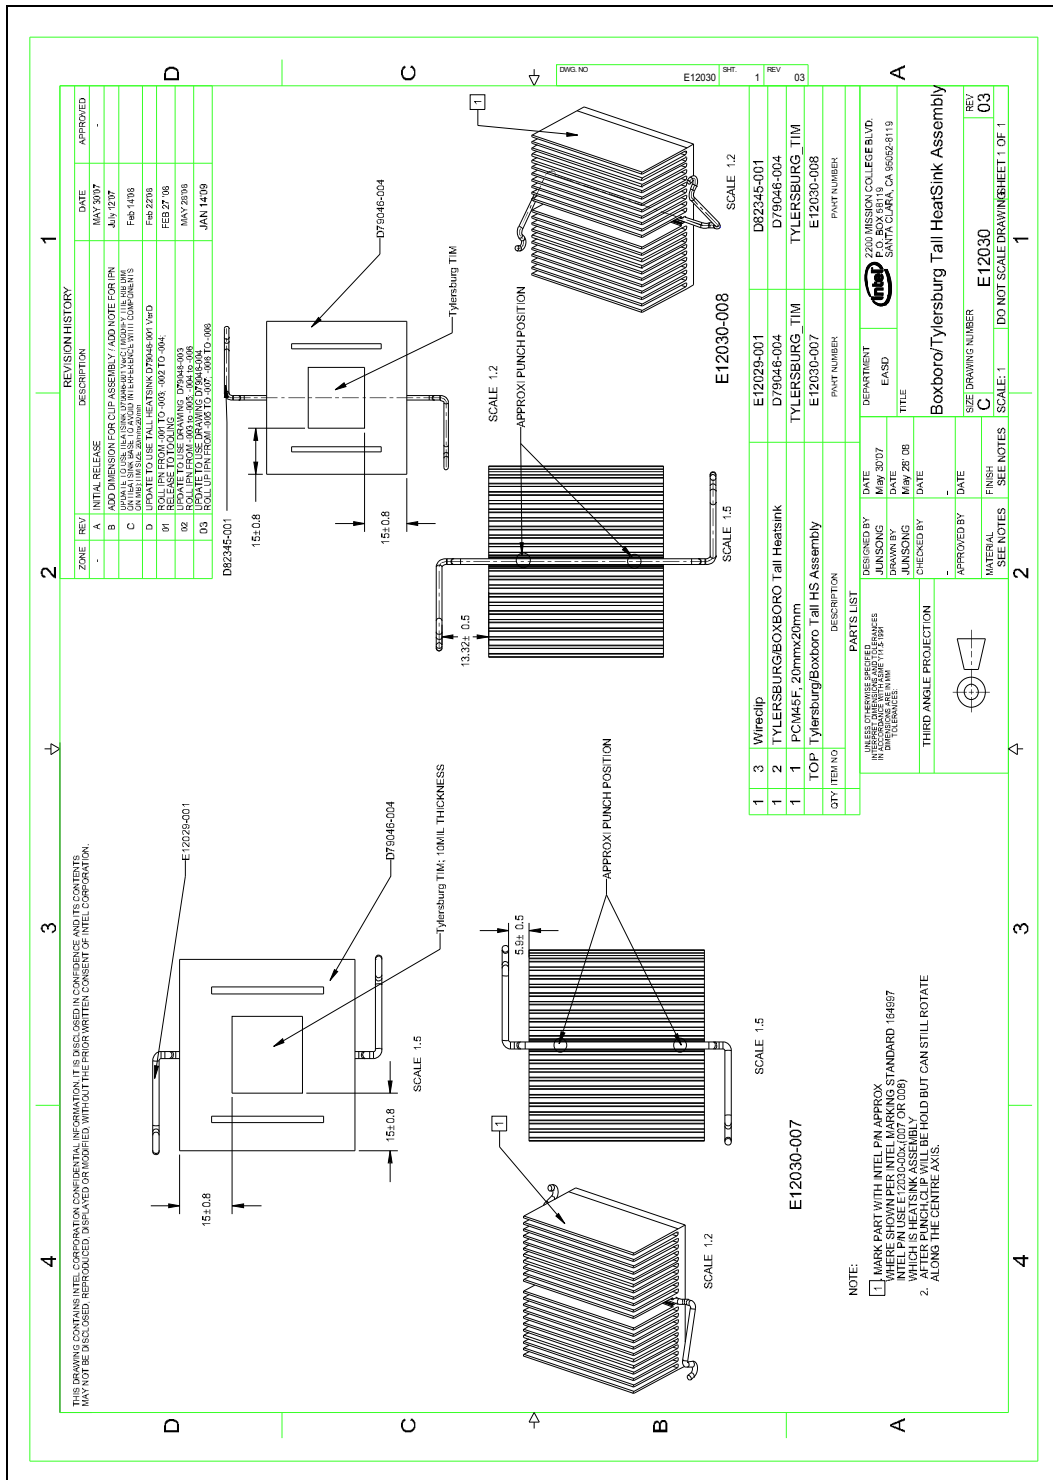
Tall Torsional Heatsink Drawing 1 (1 of 2)
